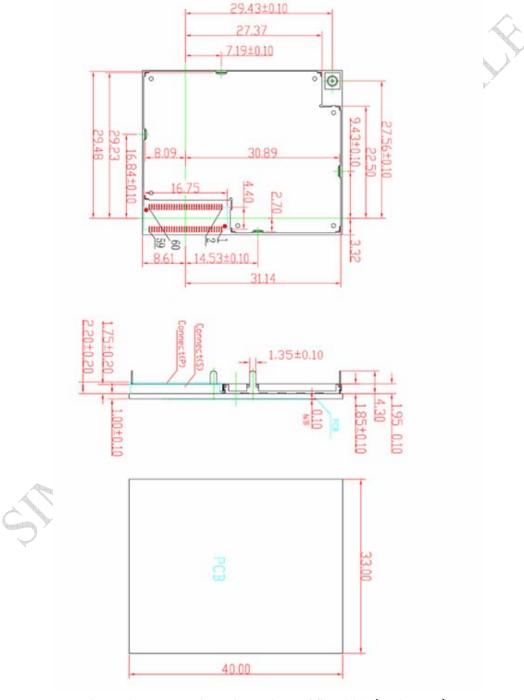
Mechanical dimensions of SIM300 (Unit: mm)
